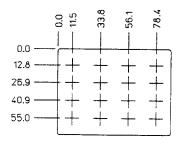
MODULE REAR 16 COMPONENT GRIDWORK, 2 SLOT MODULE
